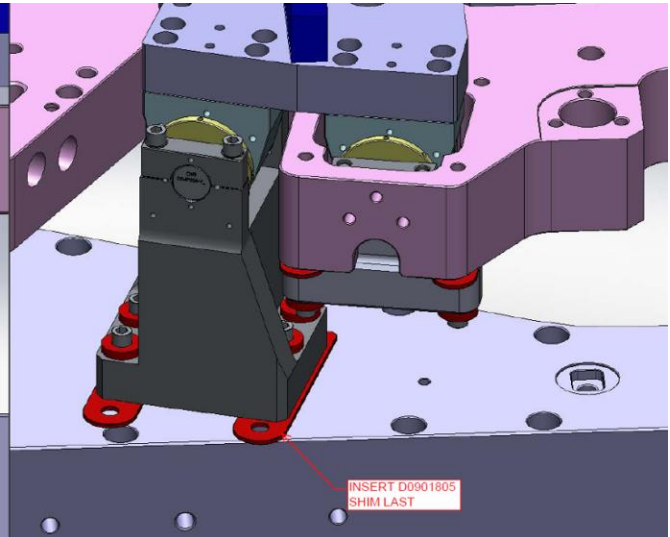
D1000854 Stage 0-1 Locker Assembly Installation 2/2
